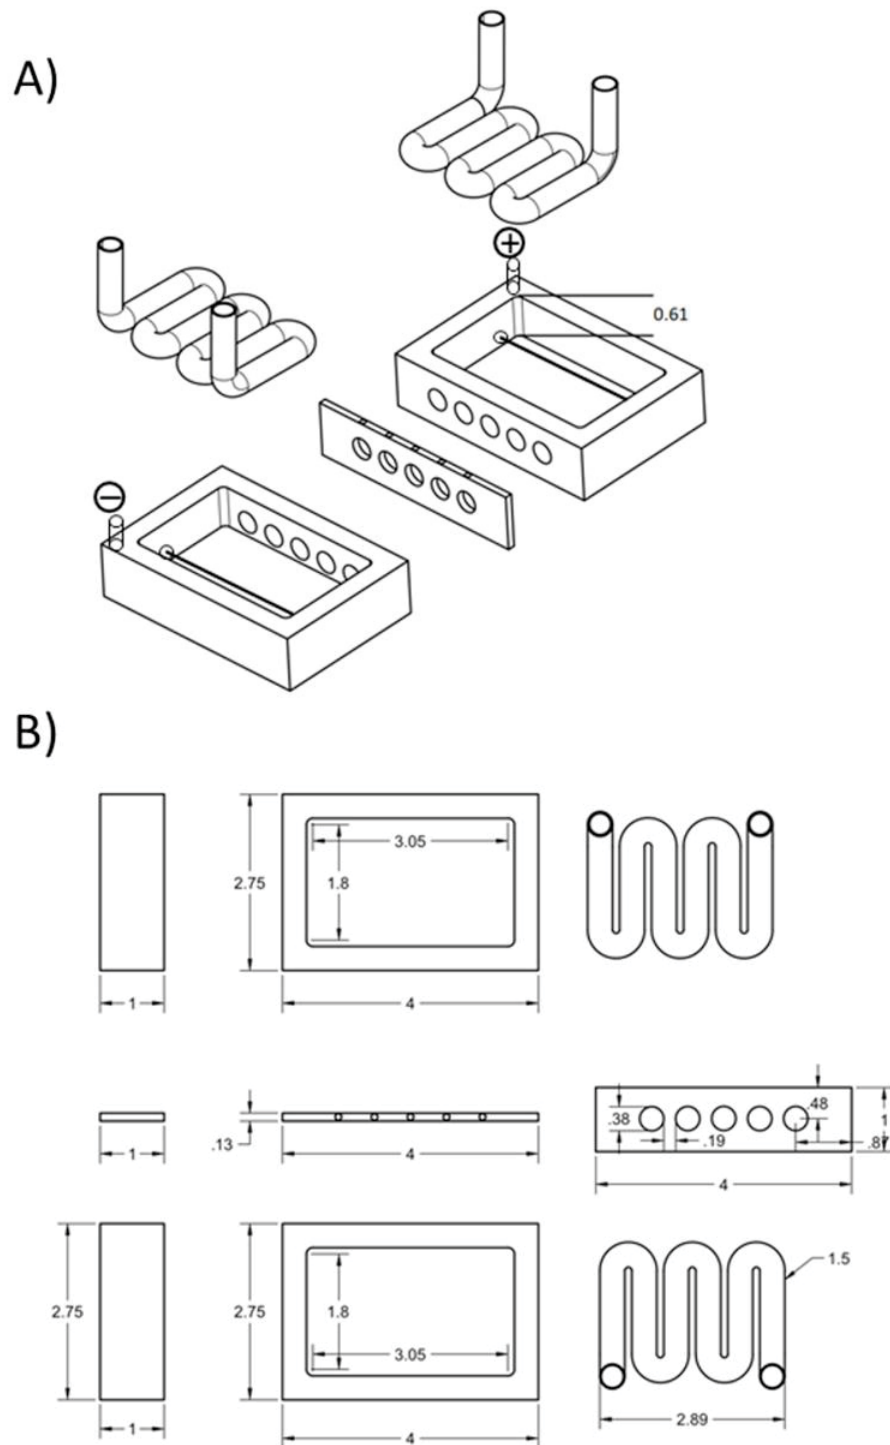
A) The CAD design sheet showing the AC-TME component's dimensions and relative size to each other. B) The sample cartridge comprises five sample wells of cylindrical shape with MWCO membranes at either end connecting the sample wells to both buffer chambers and thus creating the circuit for ions to flow from anode to cathode.
